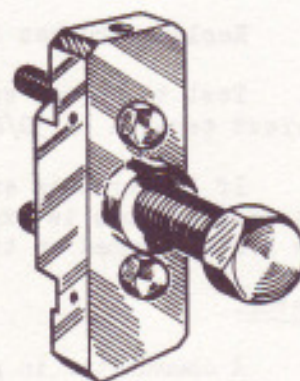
UNIVERSAL EXTRACTOR. TOOL NO. STD. 505.
